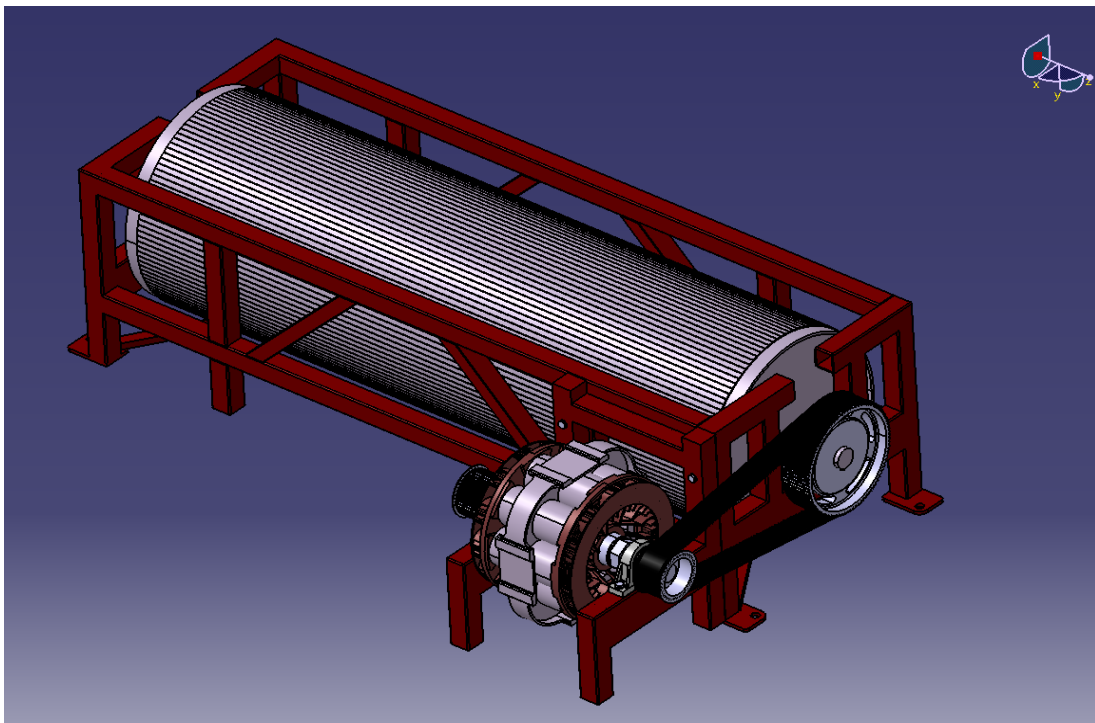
Three Dimensional Eddy Current Chassis Dynamometer
